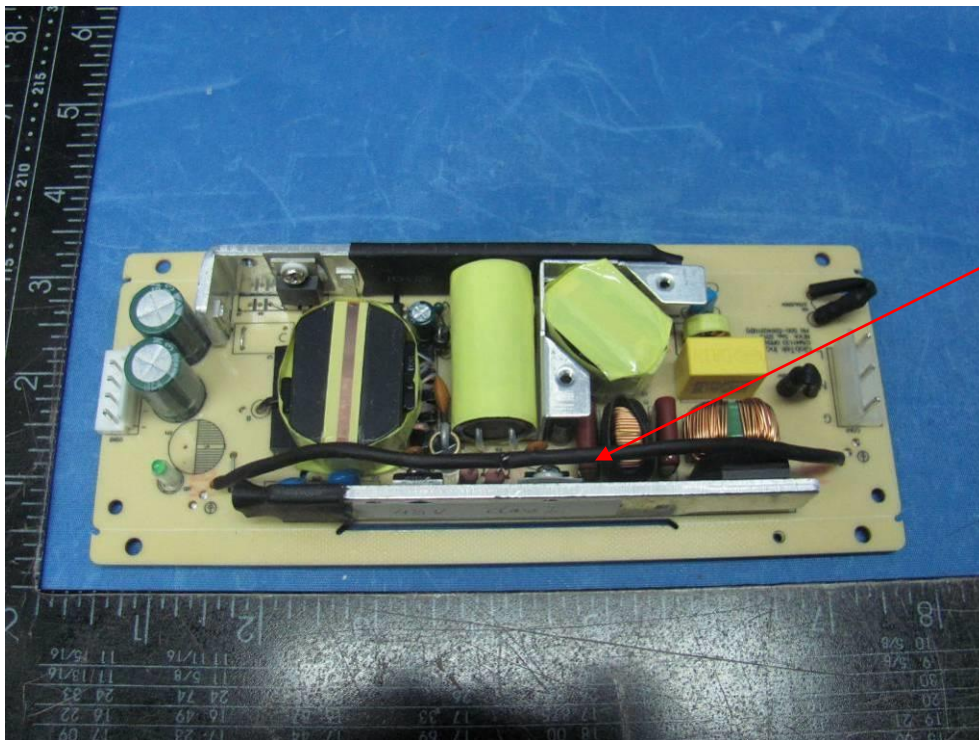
GT\*41133 series Component side view of PCB for open frame model
